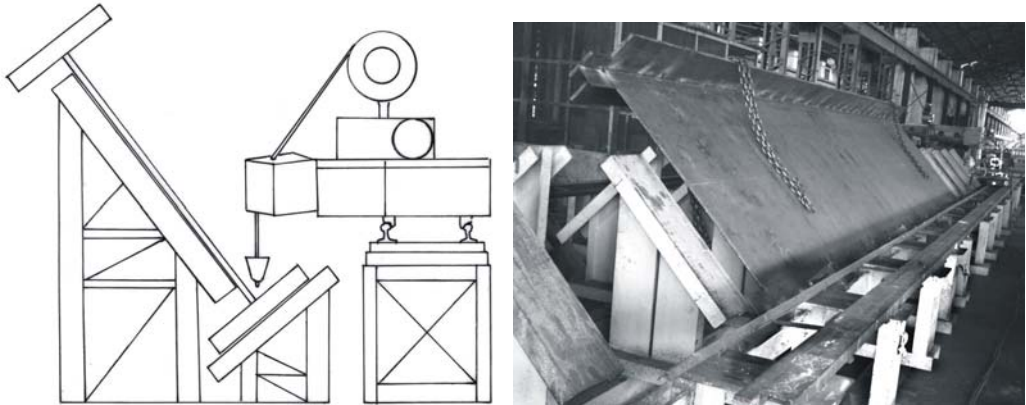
Plate girder on fixture for SAW welding of the fillet weld between web and flange plates
